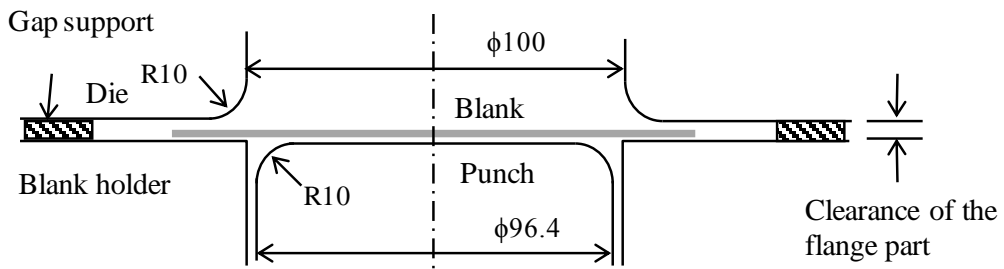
Cross-sectional profile of the tool used for evaluation of limiting drawing ratio in hot stamping by the die with gap support at the flange part
